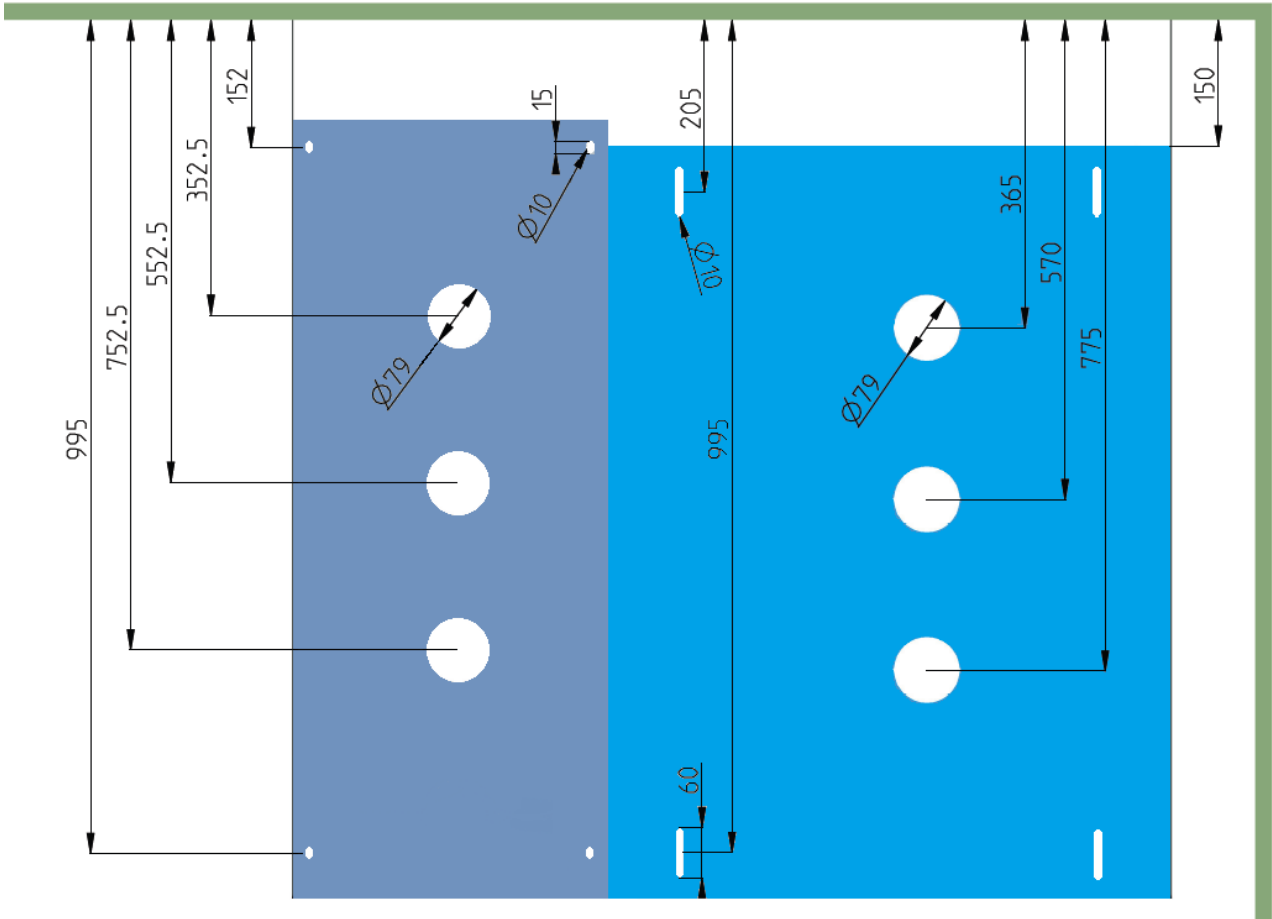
Erection: Coupling a DF-3 to a DF-2 cubicle
